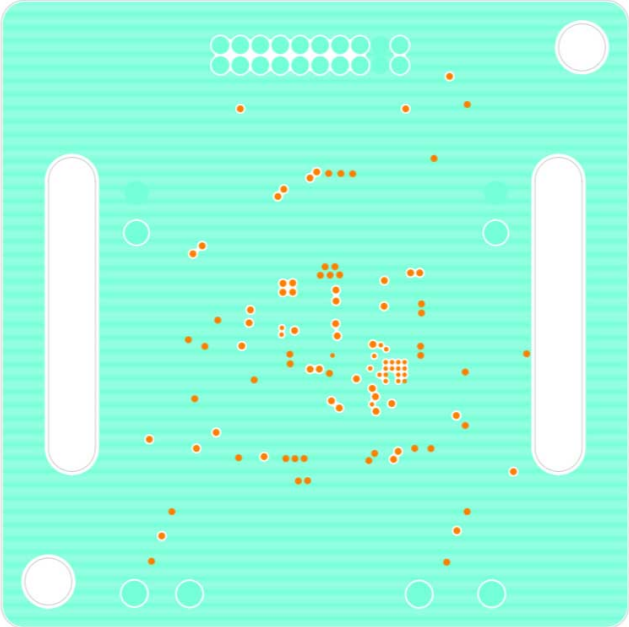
EVAL-ADPD6000Z PCB Layout: GND 2
